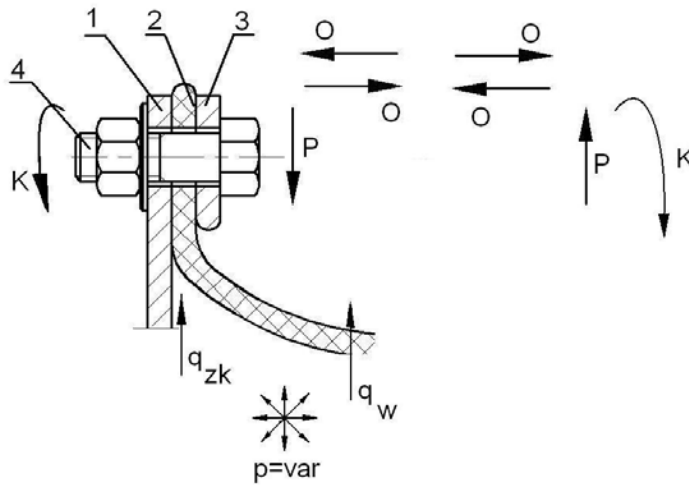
Fabric compensator installed in the flange, 1 – flange, 2 – compensator, 3 – metal clamp, 4 – bolt, q_w – leakage through the compensator material, q_{zk} - leakage along the flange – compensator interface
